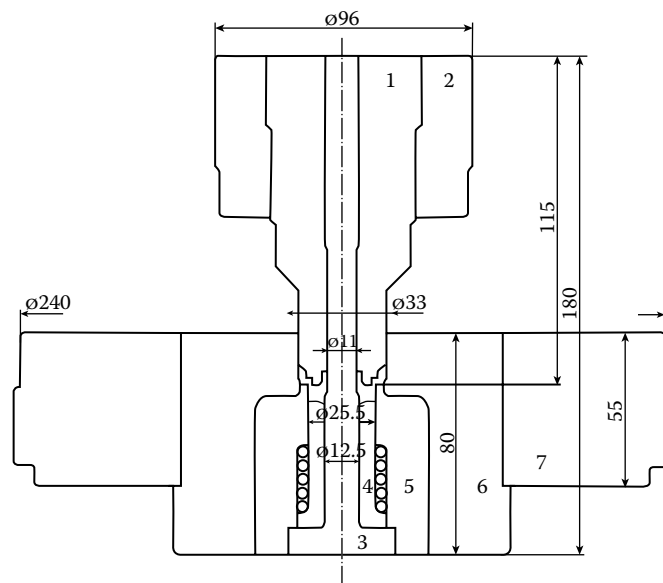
Tool set up for cold forging of hub of personal computer, Miyamoto Industry Co. 1. Punch, H11 = SKD6; 4, 5. Die, M2 = SKH51; 6. Container, D2 = SKD11
